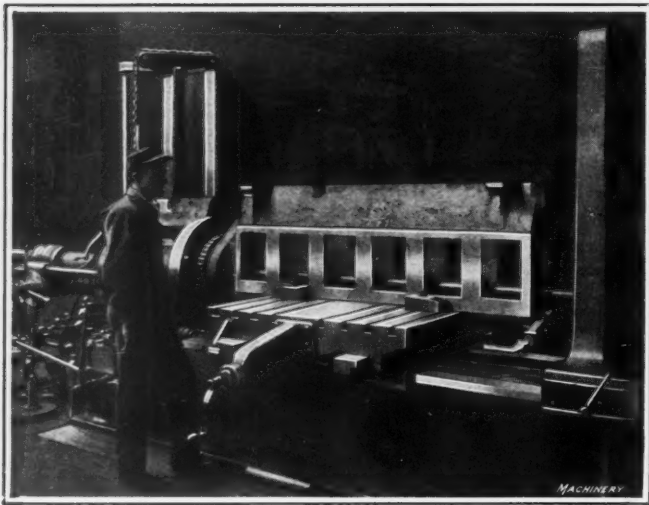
Lucas Horizontal Milling and Boring Machine boring Bearing for Six-cylinder, 120-horsepower Crank-cases
